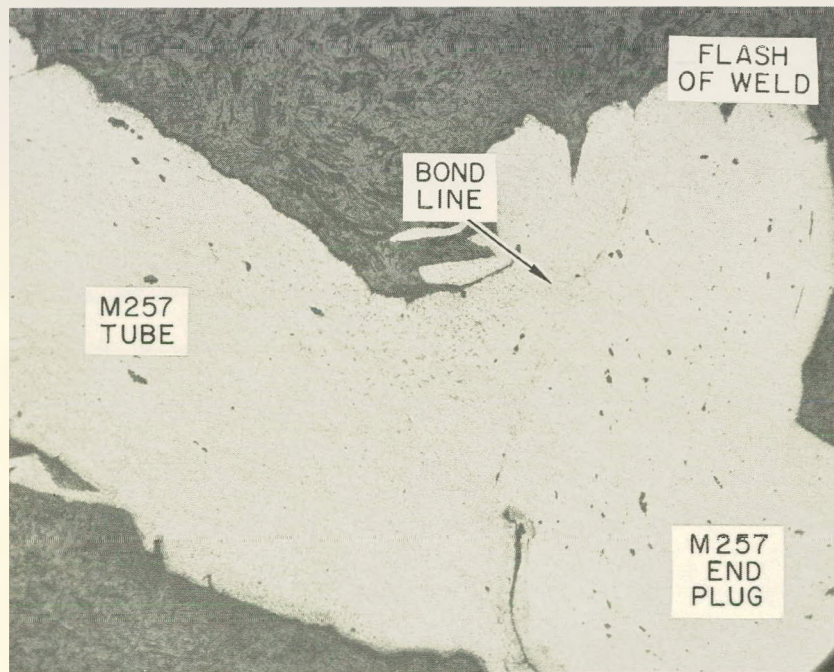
Fusion and Flash-Welded End Closures In M257 Tubing, As-Welded And After Pressurizing to Rupture
